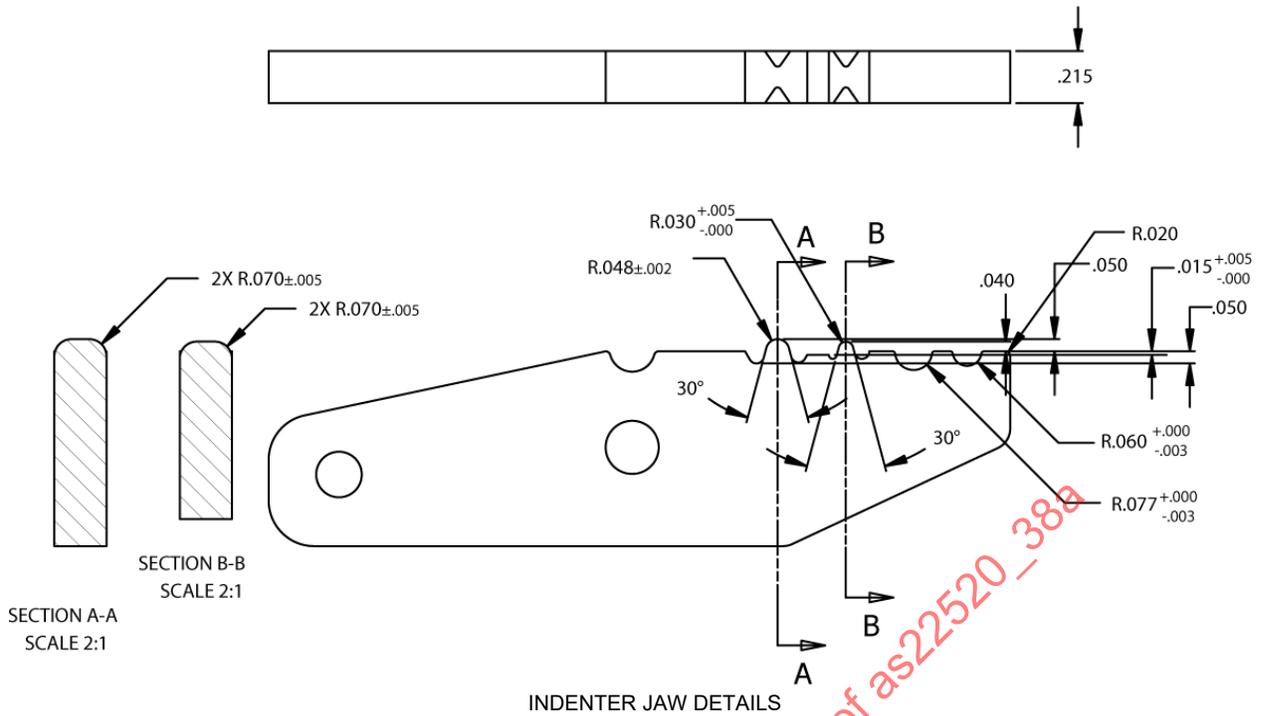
M22520/38-01 CRIMPING TOOL JAW CONFIGURATION
